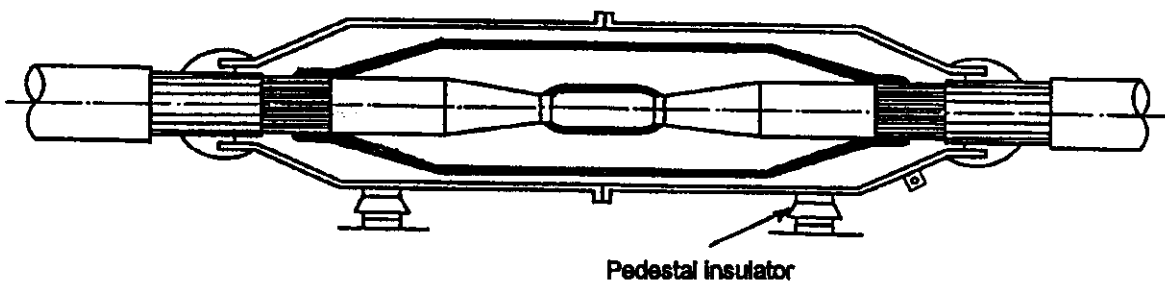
Typical protection for a joint with metallic shells for indoor installations
